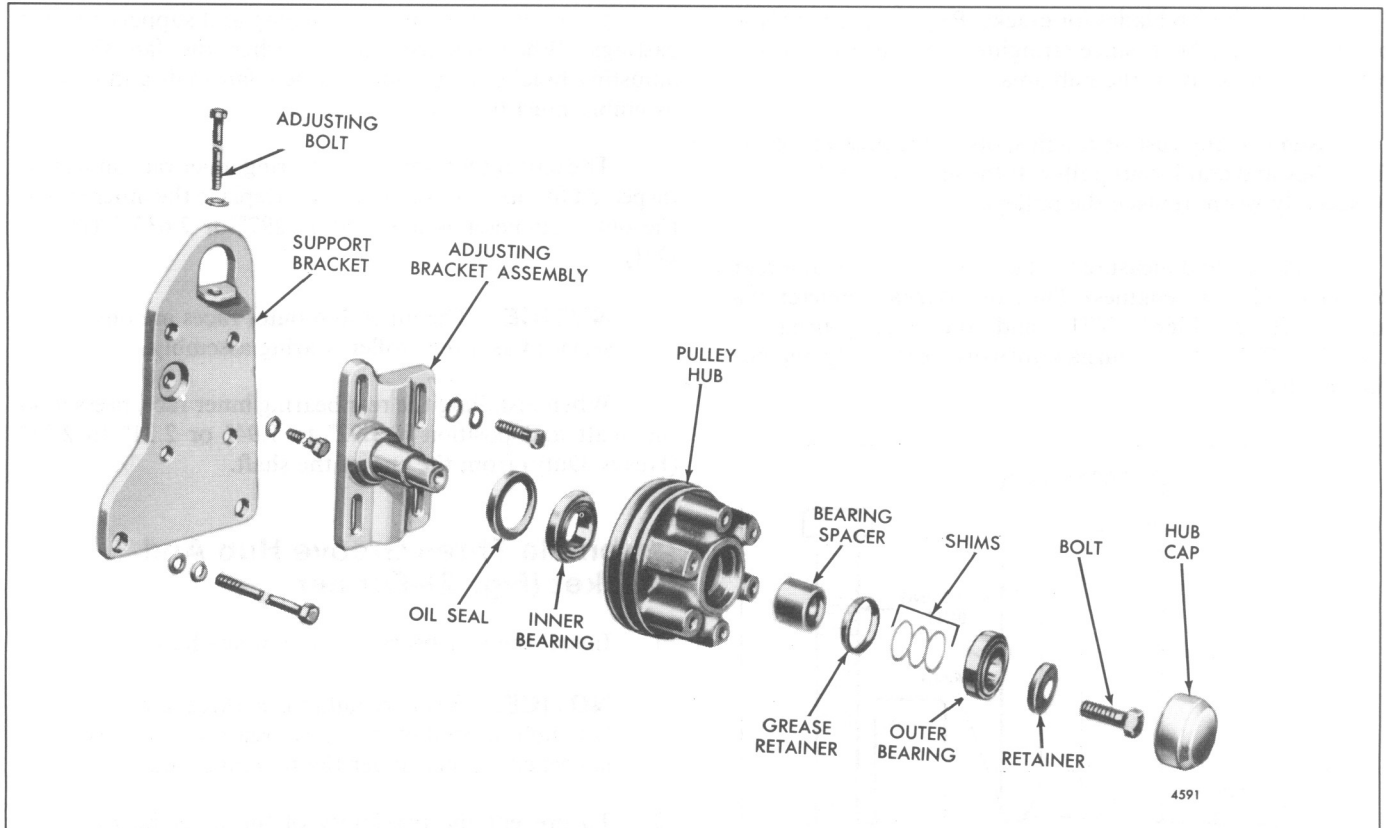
Fan Pulley, Hub and Adjusting Bracket Details for Compact Front End Engines
